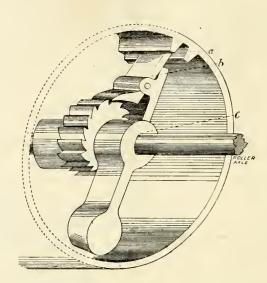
ARRANGEMENT EMPLOYED ON ROLLFR-TYPE MACHINES, TO PERMIT THE MACHINE TO TURN CORNERS, AND TO BE DRAWN BACKWARDS.
